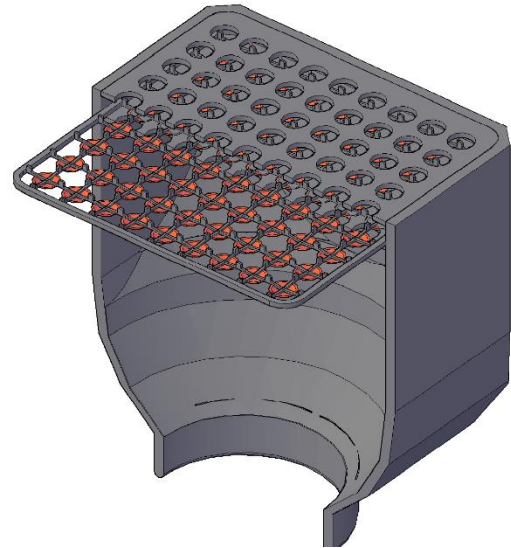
Lower tie plate of the fuel bundle equipped with RFRD to prevent the reverse flow
